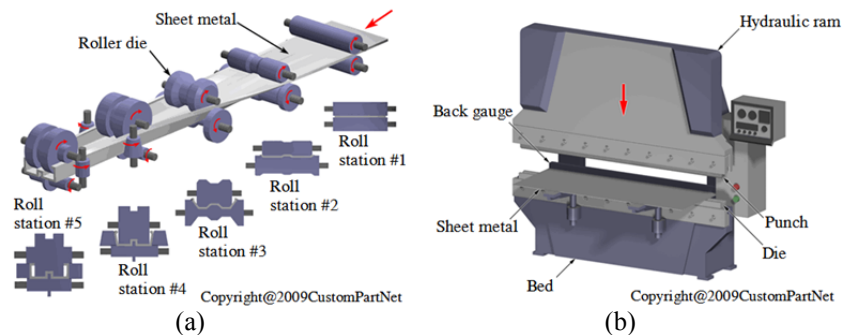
Cold-forming processes (a) roll-forming and (b) brake-pressing (Courtesy of CustomPartNet Inc.)
